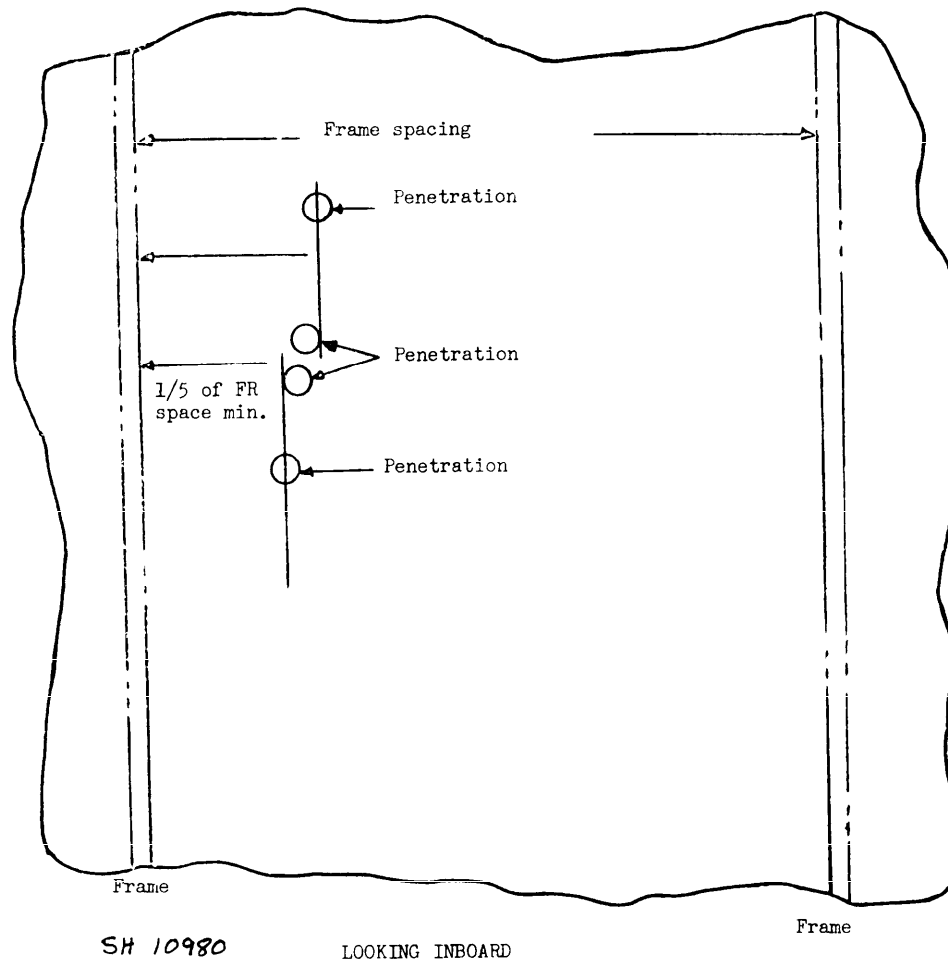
Location of penetration attachment welds in relation to butts and seams.
